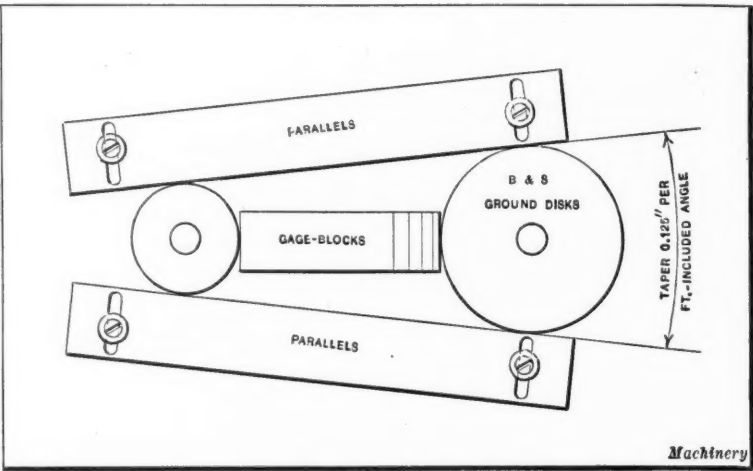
Set-up of Parallels, Disks, and Gage-blocks to test the Taper of the Gage shown at W, Fig. 7
